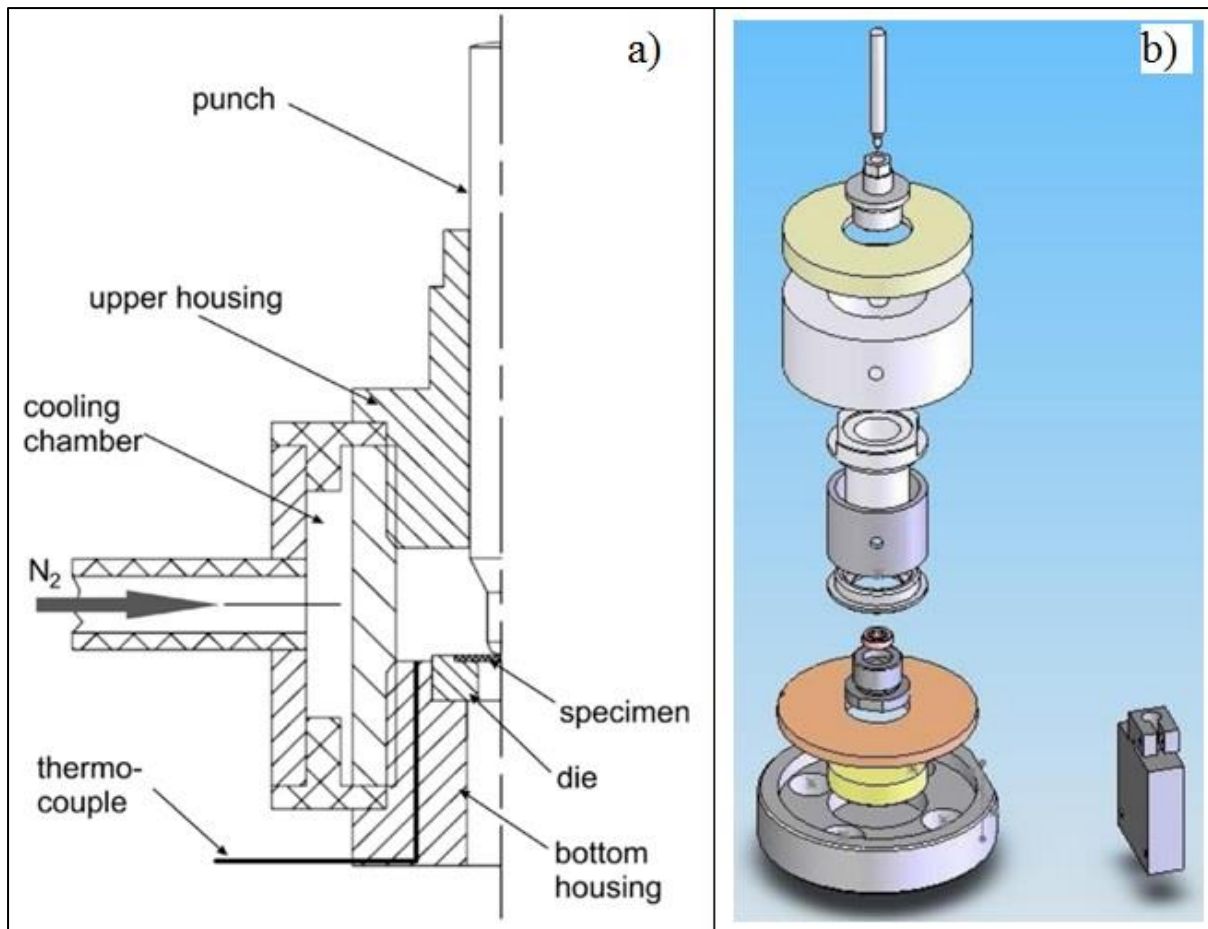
SPT apparatus for DBTT: a) schematic and b) 3D exploded view model by Rasche and Kuna [23].
